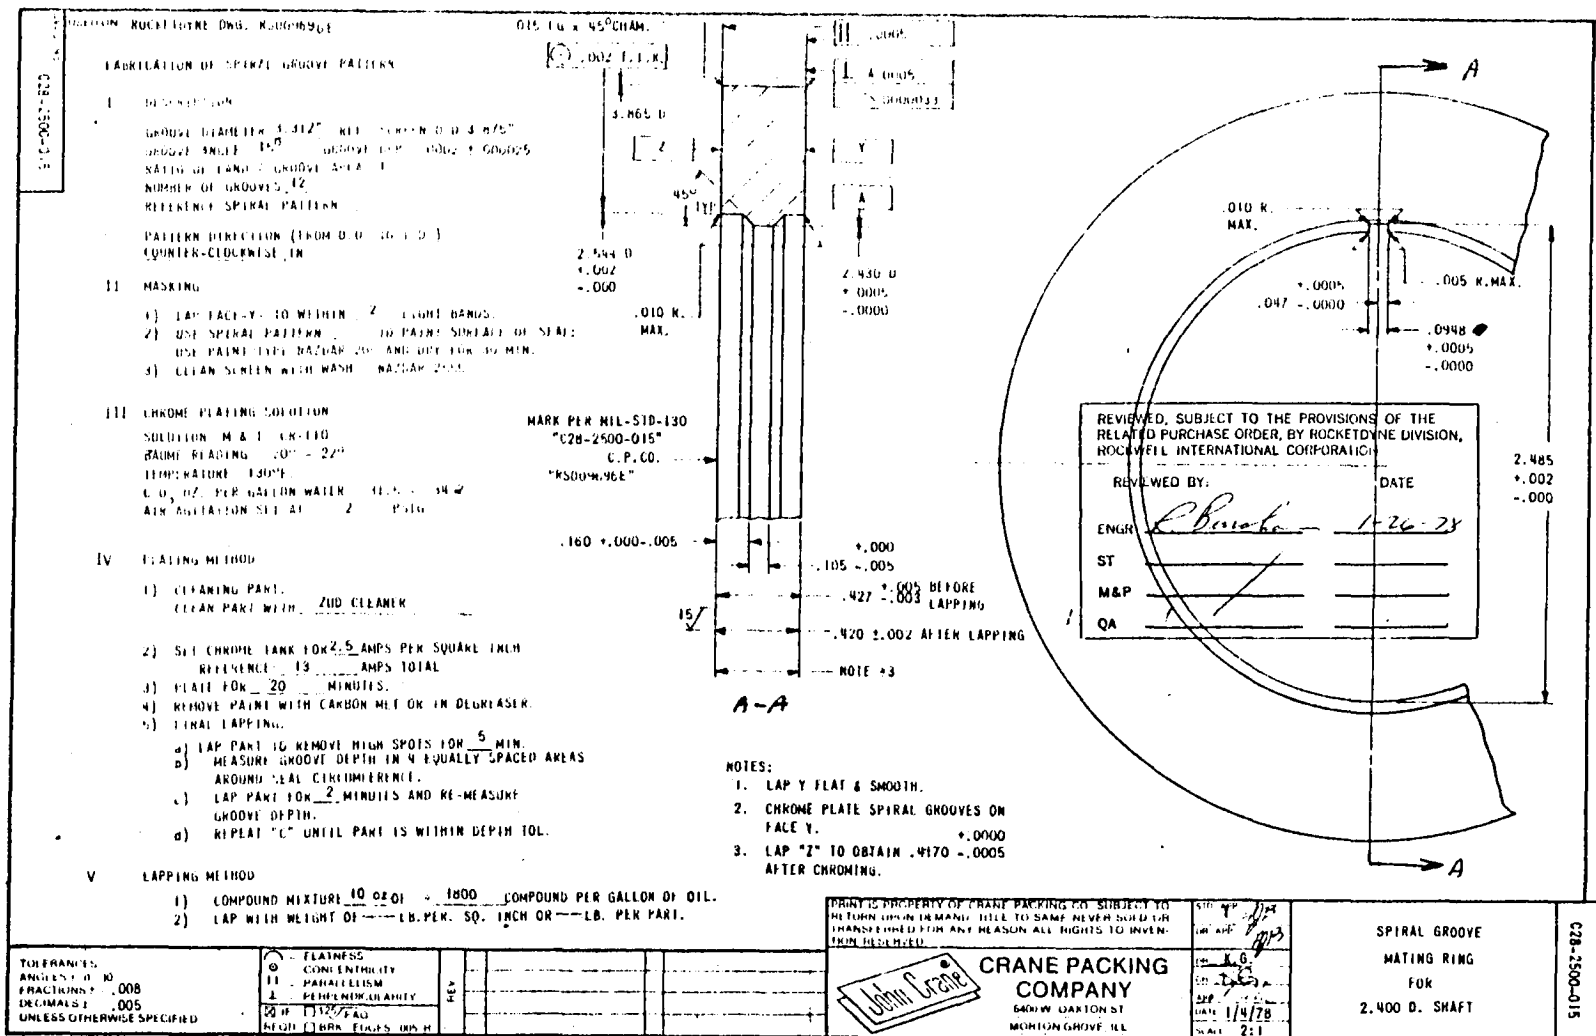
Phase IV Basic Inward Pumping Spiral Groove LOX Seal Mating Ring (Crane Packing Company)
